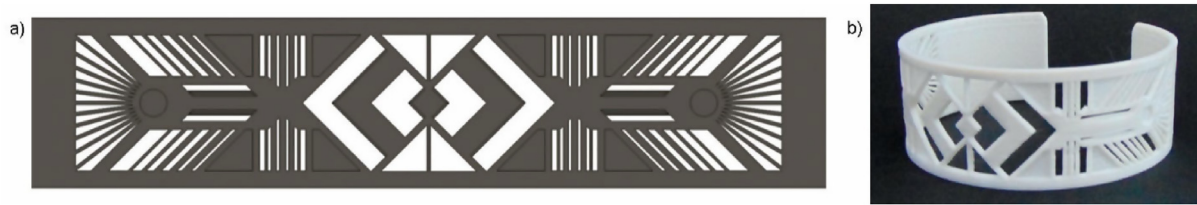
Benchmark model – bracelet: (a) unfolded CAD model; (b) fabricated model [13].
